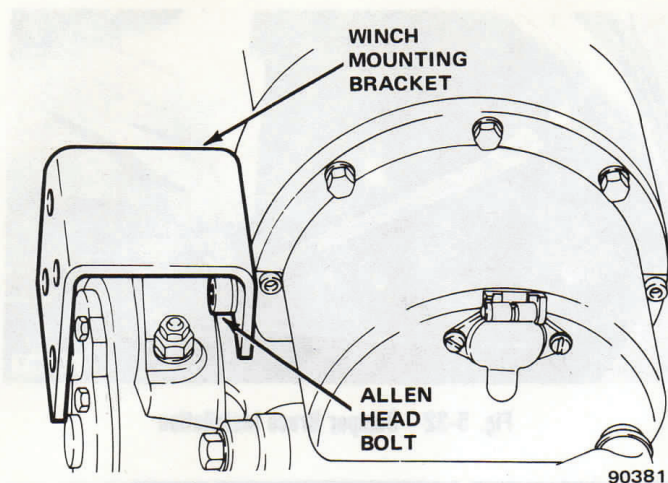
Allen Head Bolt Location in Winch Mounting Bracket
